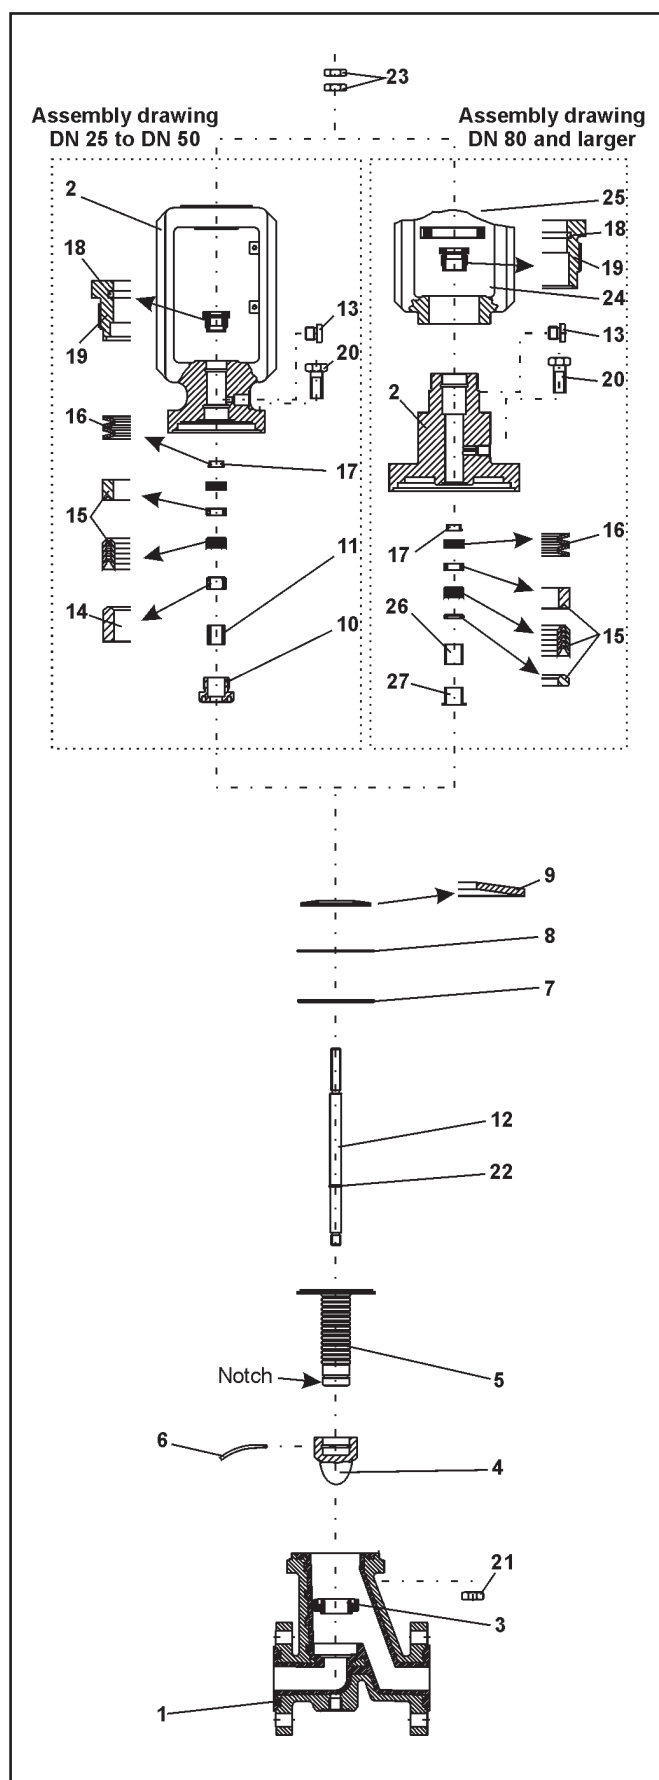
Explosion drawing of Series 1b Control Valve, manufactured before 2006
